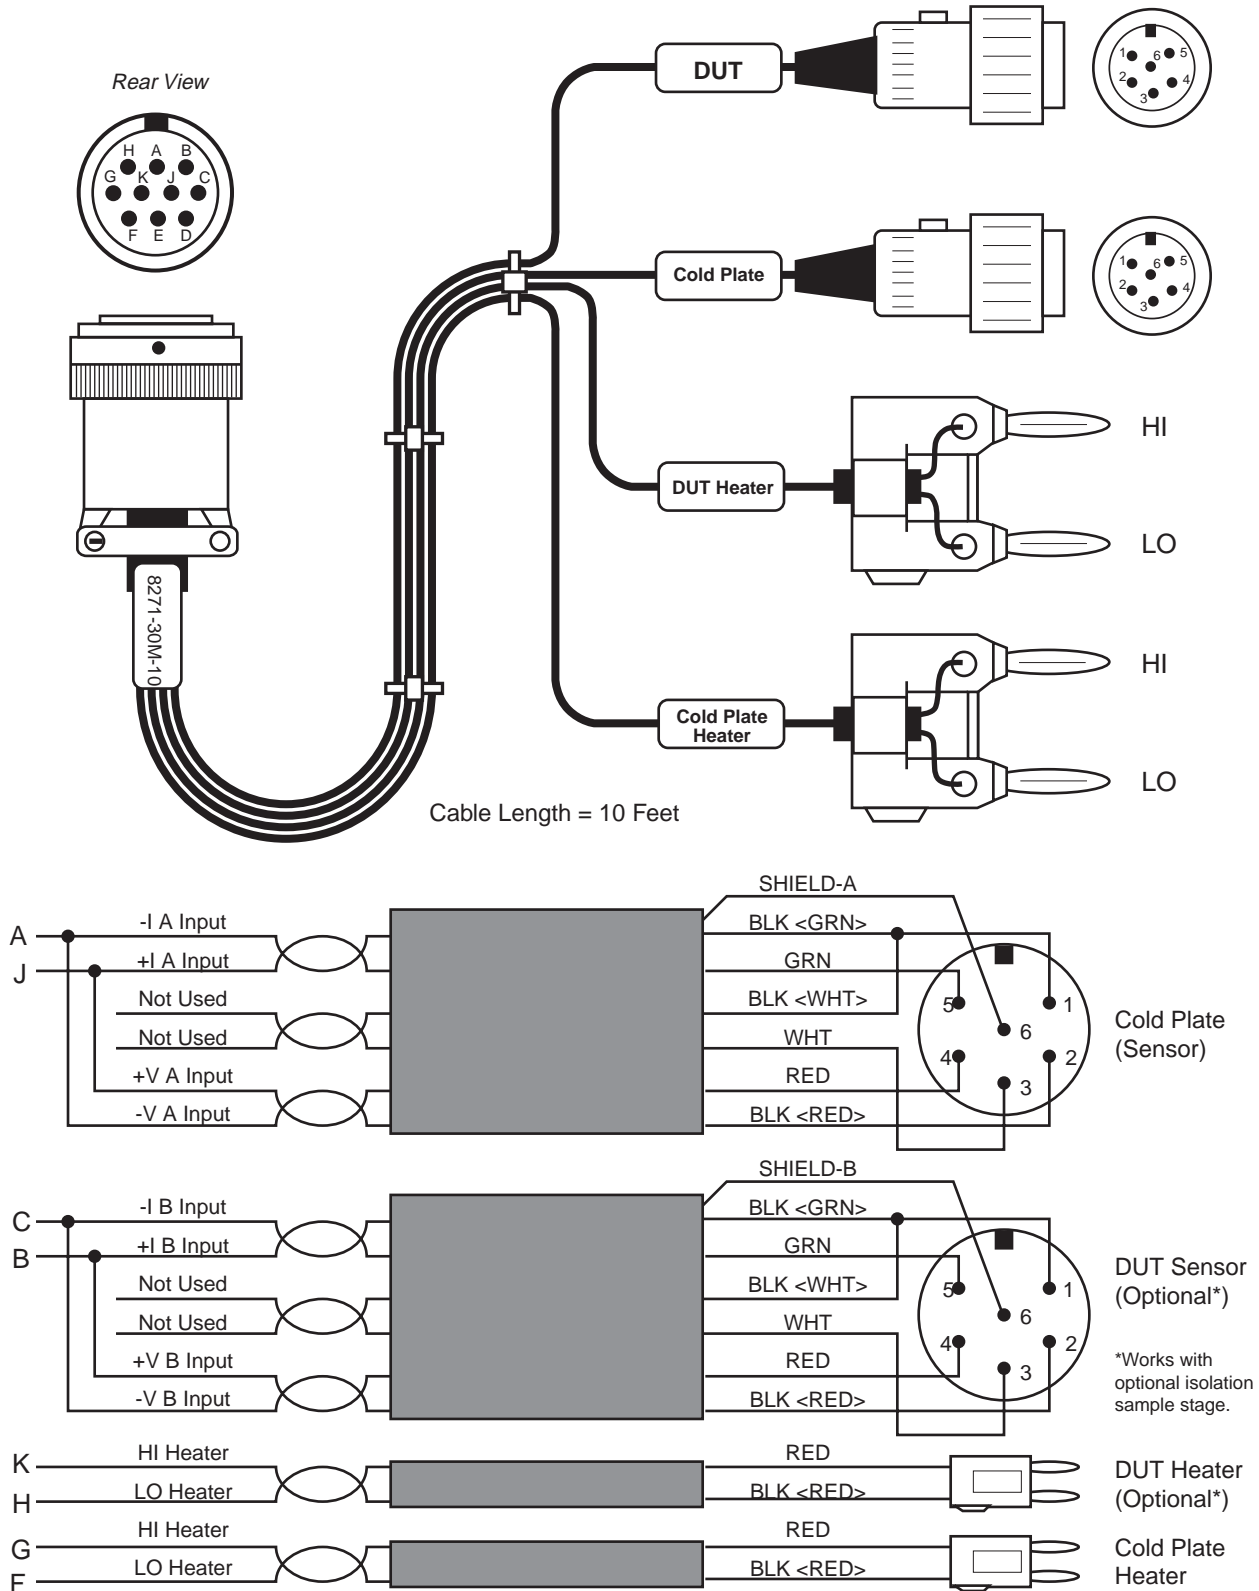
Definition of Model 8271-30M-10 Cable Assembly
